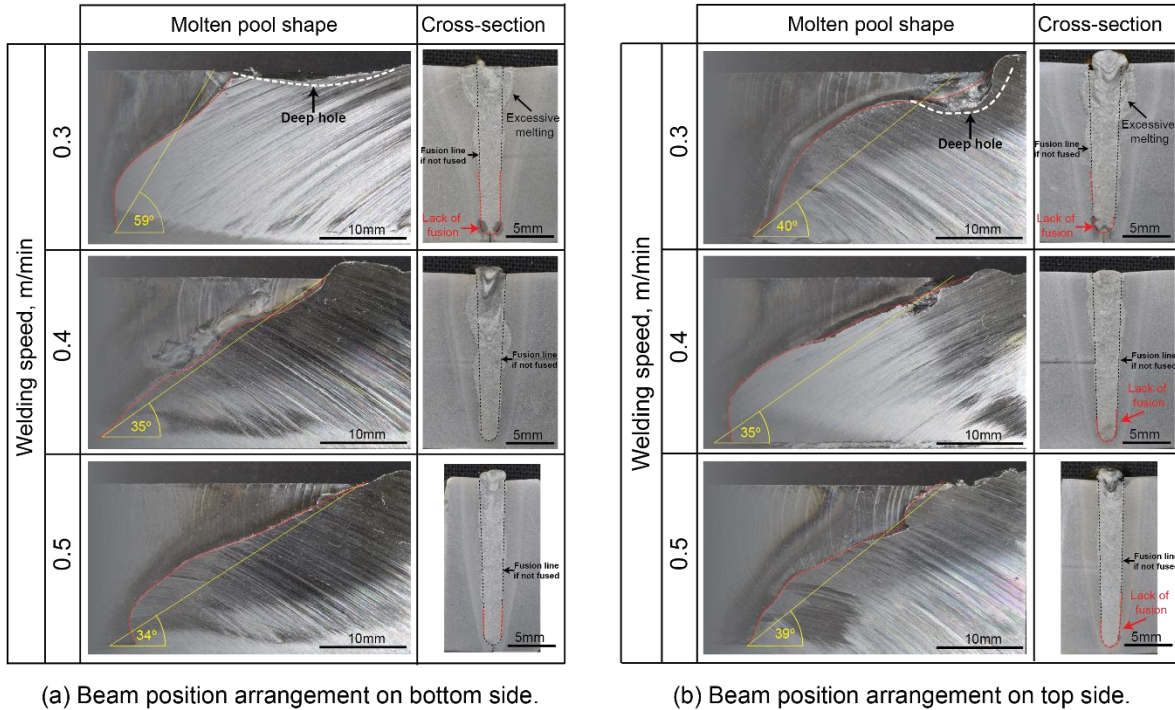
Cross-sections of weld bead fronts in welding direction and cross-sections of joints.
